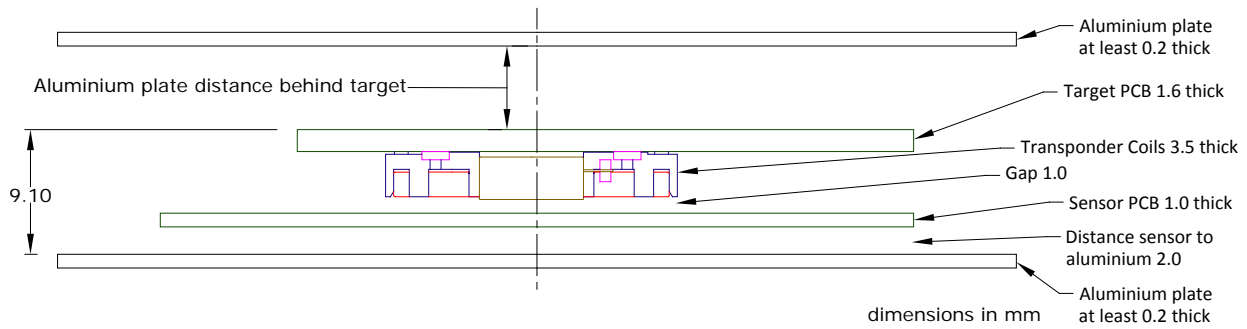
Between Aluminium Plates, Sensor 2mm Above Aluminium
